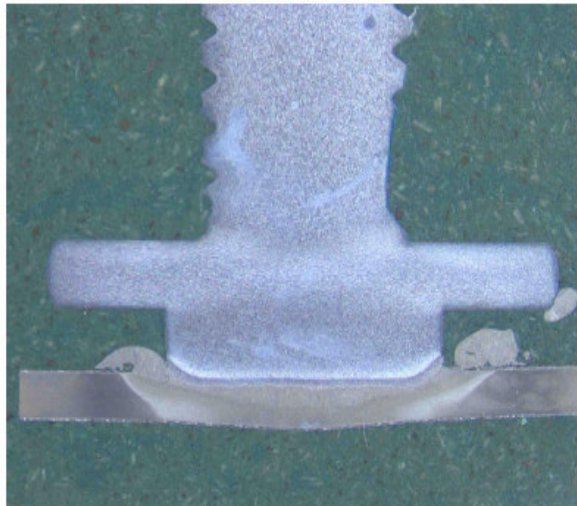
M6 Large Flange Stud Welded to HSB Steel
